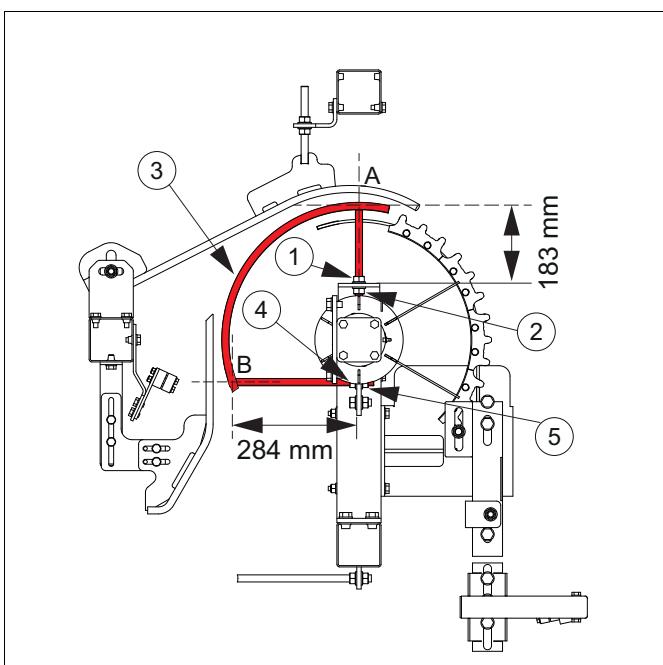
Adjust the unloading ramp inside shackle guide horizontally
